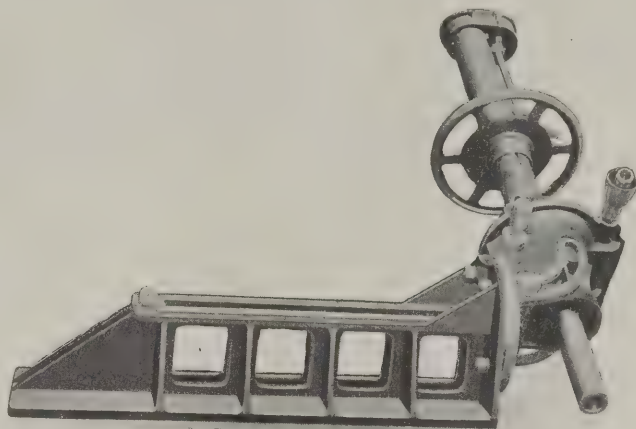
Large Size Portable Milling and Drilling Tool.
